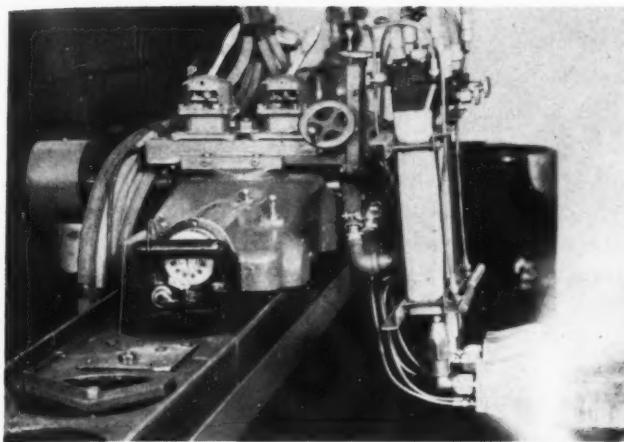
Flame softening the flame cut edge of thick steel plate in accordance with Curve No. 5 shown below
